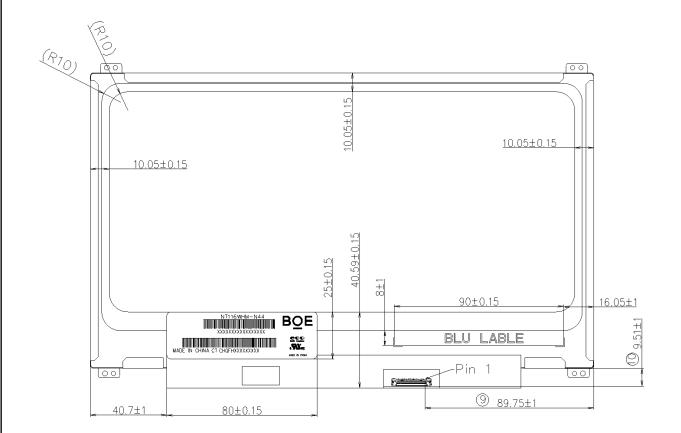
TFT-LCD Module Outline Dimensions (Rear view)
